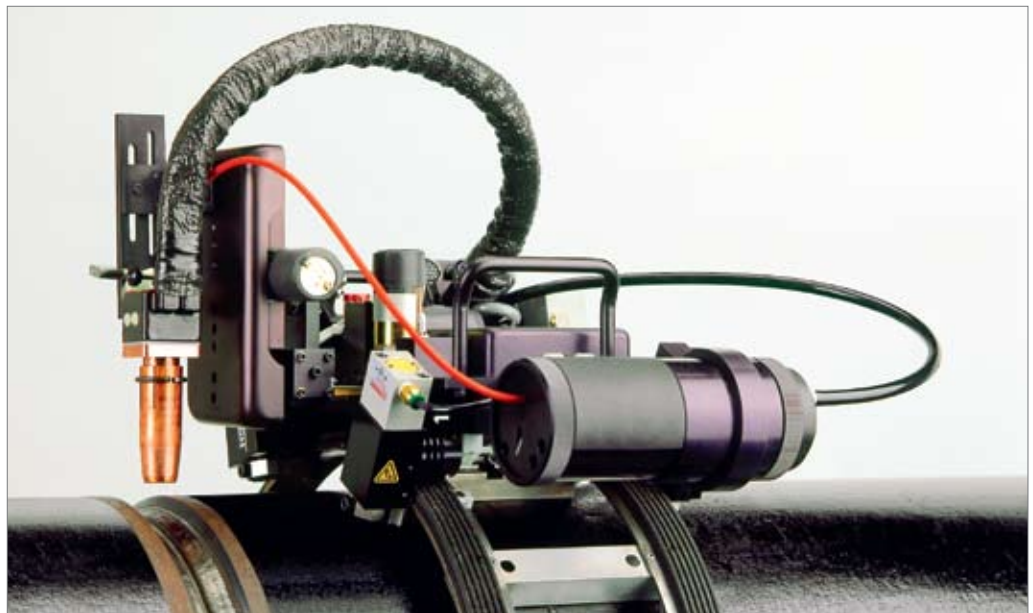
Magnatech's Pipeliner II orbital welding system.
